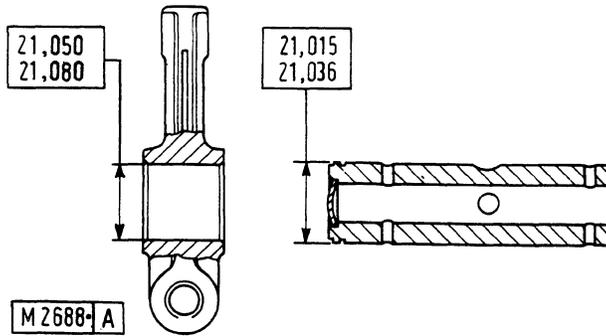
Rocker arm shaft and rocker arm bore dimensions.
